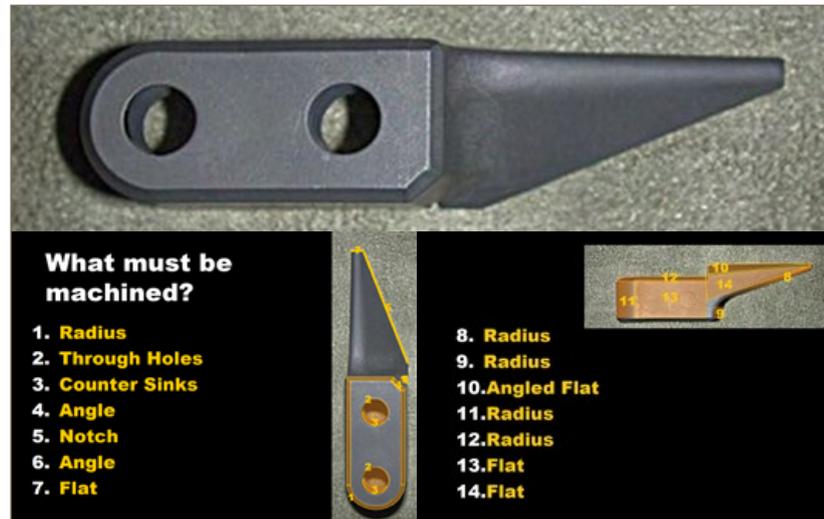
Pre-forming, green machining and powder injection moulding are the only viable options for producing this hardmetal part. The pre-formed green hardmetal part requires 14 machining steps
